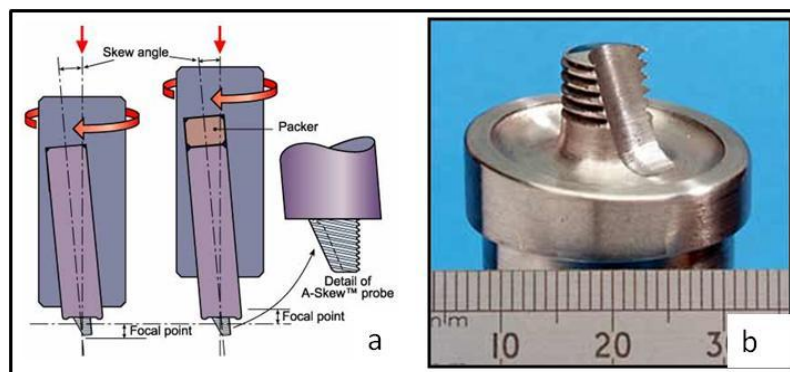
, a) Skew Stir Tooling Concept. b) Prototype Asymmetric Skew-Stir™ Tool. [15]
